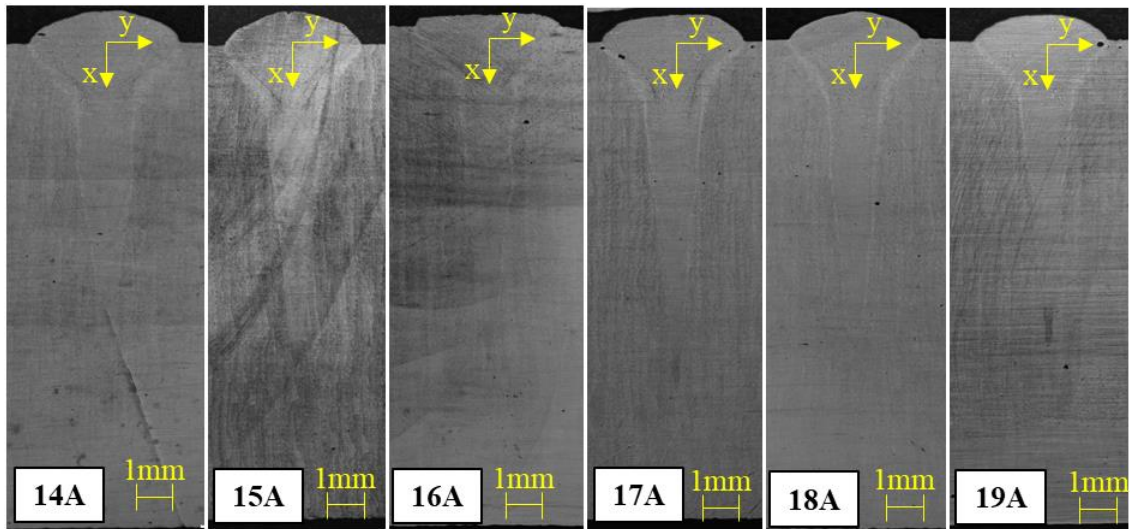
Weld geometry for SLM+EBW samples 14A to 19A.
